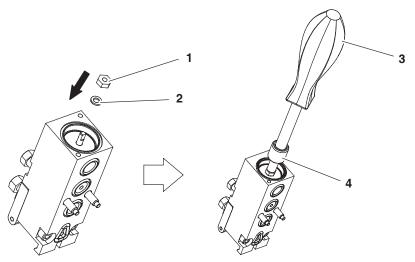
Using the stem wrench tool to remove the 5-40 nut and lock washer
